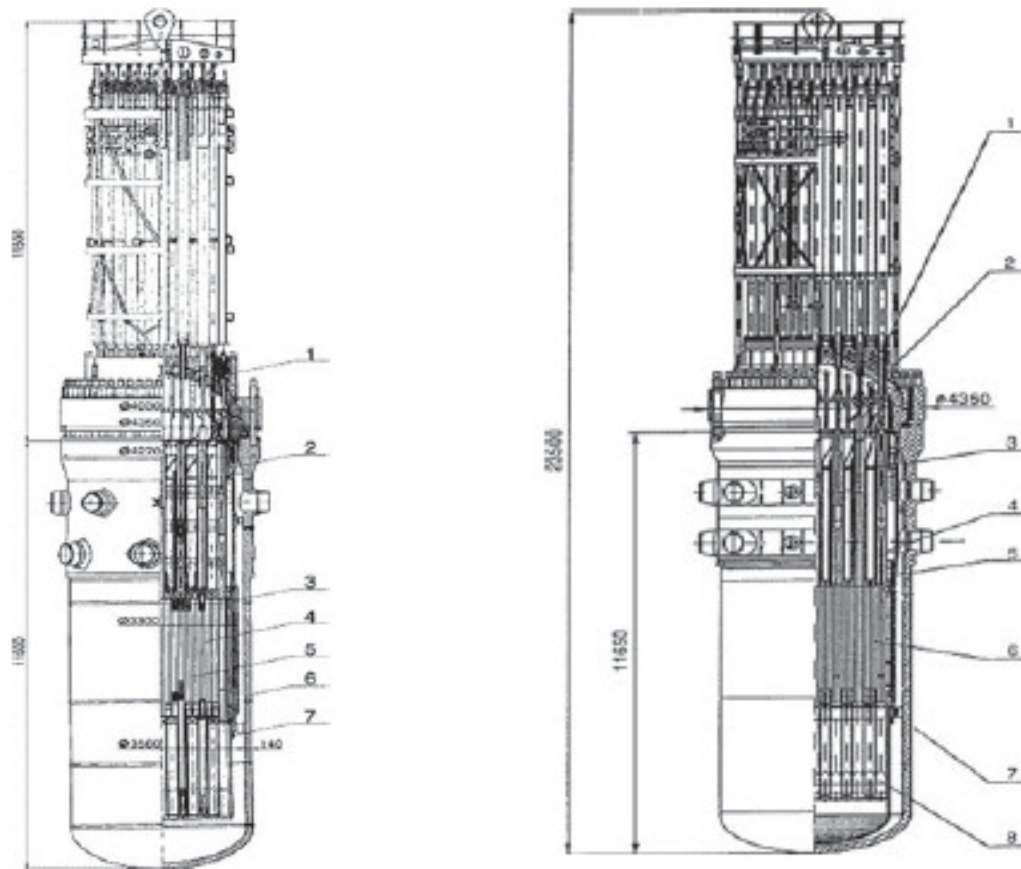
Reactor V-230 (left), 1 - Top head, 2 – protective tube unit, 3 - Core barrel, 4-ERC assembly, 5 - working assembly, 6 - Vessel, 7 – Core barrel bottom. Reactor V-213 (right), 1 – ERC drive, 2 – Top head unit, 3 – Protective tube unit, 4 – intermediate rod, 5 – Core barrel, 6 – Reactor core, 7 – Reactor vessel, 8 – Core barrel bottom.
